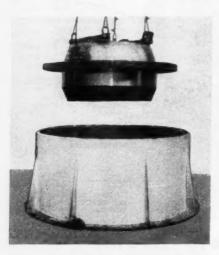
Cooled Bearing Hub Being Hoisted Out of Cooling Chamber.
